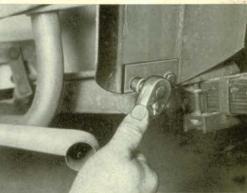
Remove carburetor starter slide(choke piston)and wrap it in a clean cloth. (open ended spanner 11 mm) 15.Detach exhaust flange from engine. (socket spanner with universal joint 12 mm) 16.Disconnect the silencer from its rear attachment. (socket spanner 10 mm with ratchet. ring spanner 10 mm for counteracting on unscrewing) flange.
